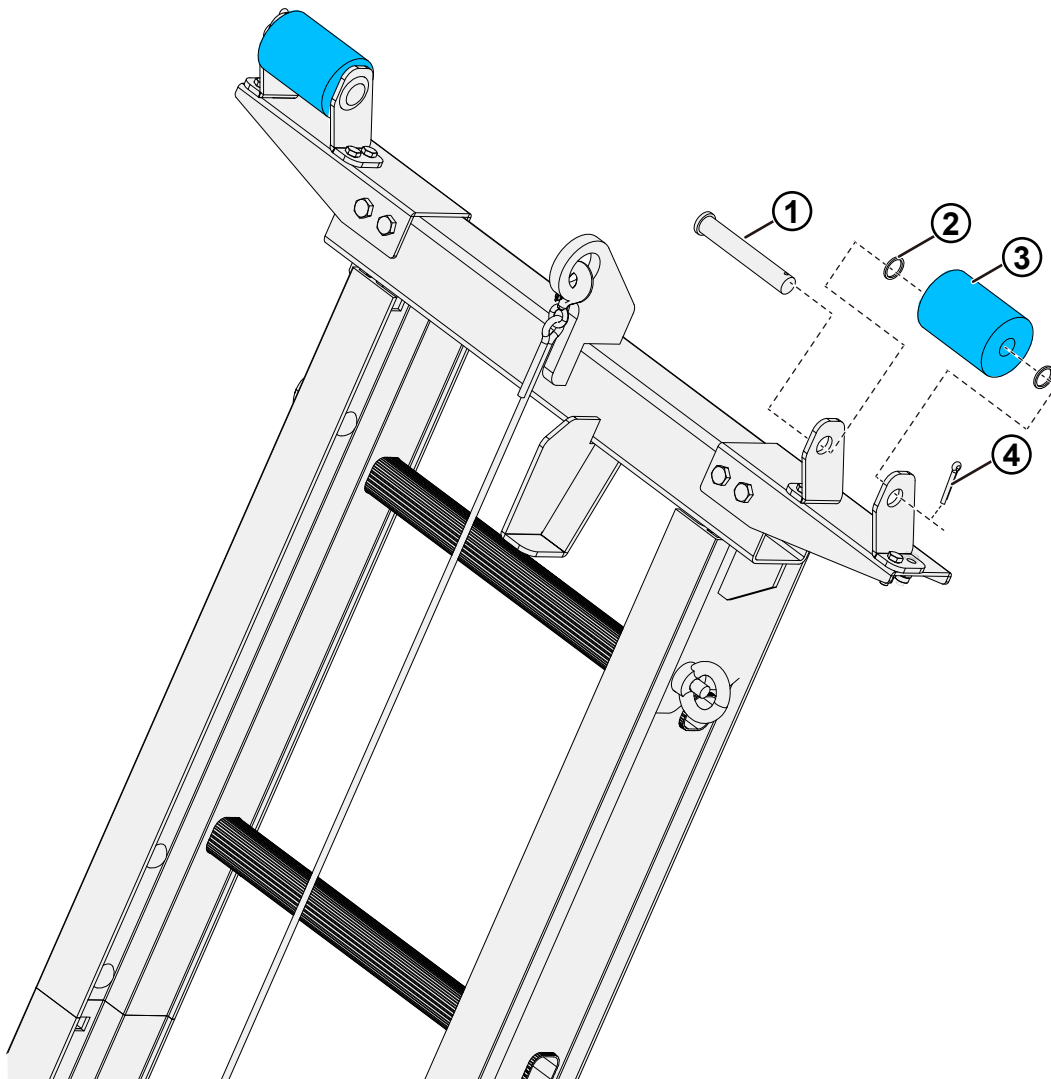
Replacing Consumable Parts of the Solar Panel Platform
